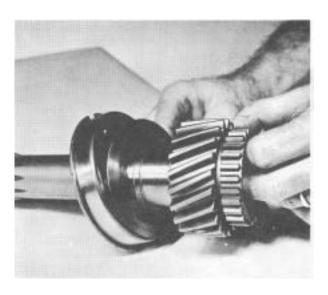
Remove main drive gear bearing retainer ring. Press bearing and oil slinger from main drive gear. Replace gear or bearing and install as shown. Install retainer ring.
